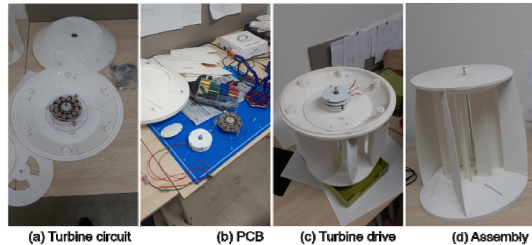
Manufacturing process of dual small wind generator using PCB circuit and main body assembly.
